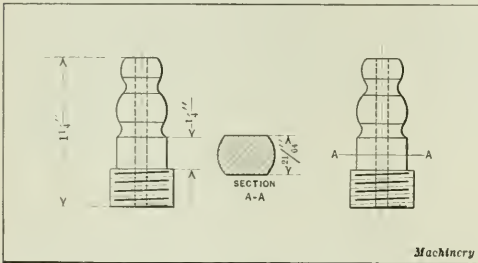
Tube Connection requiring Machined Flats at Section A-A
